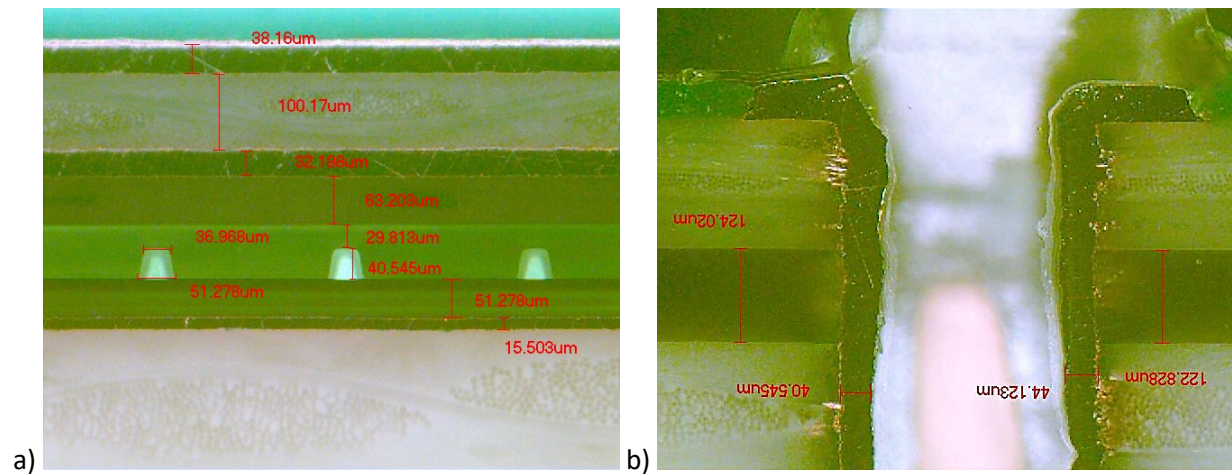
(a): Cross-section of O/E PCB showing electrical and optical layers (b) close view to optical layer
